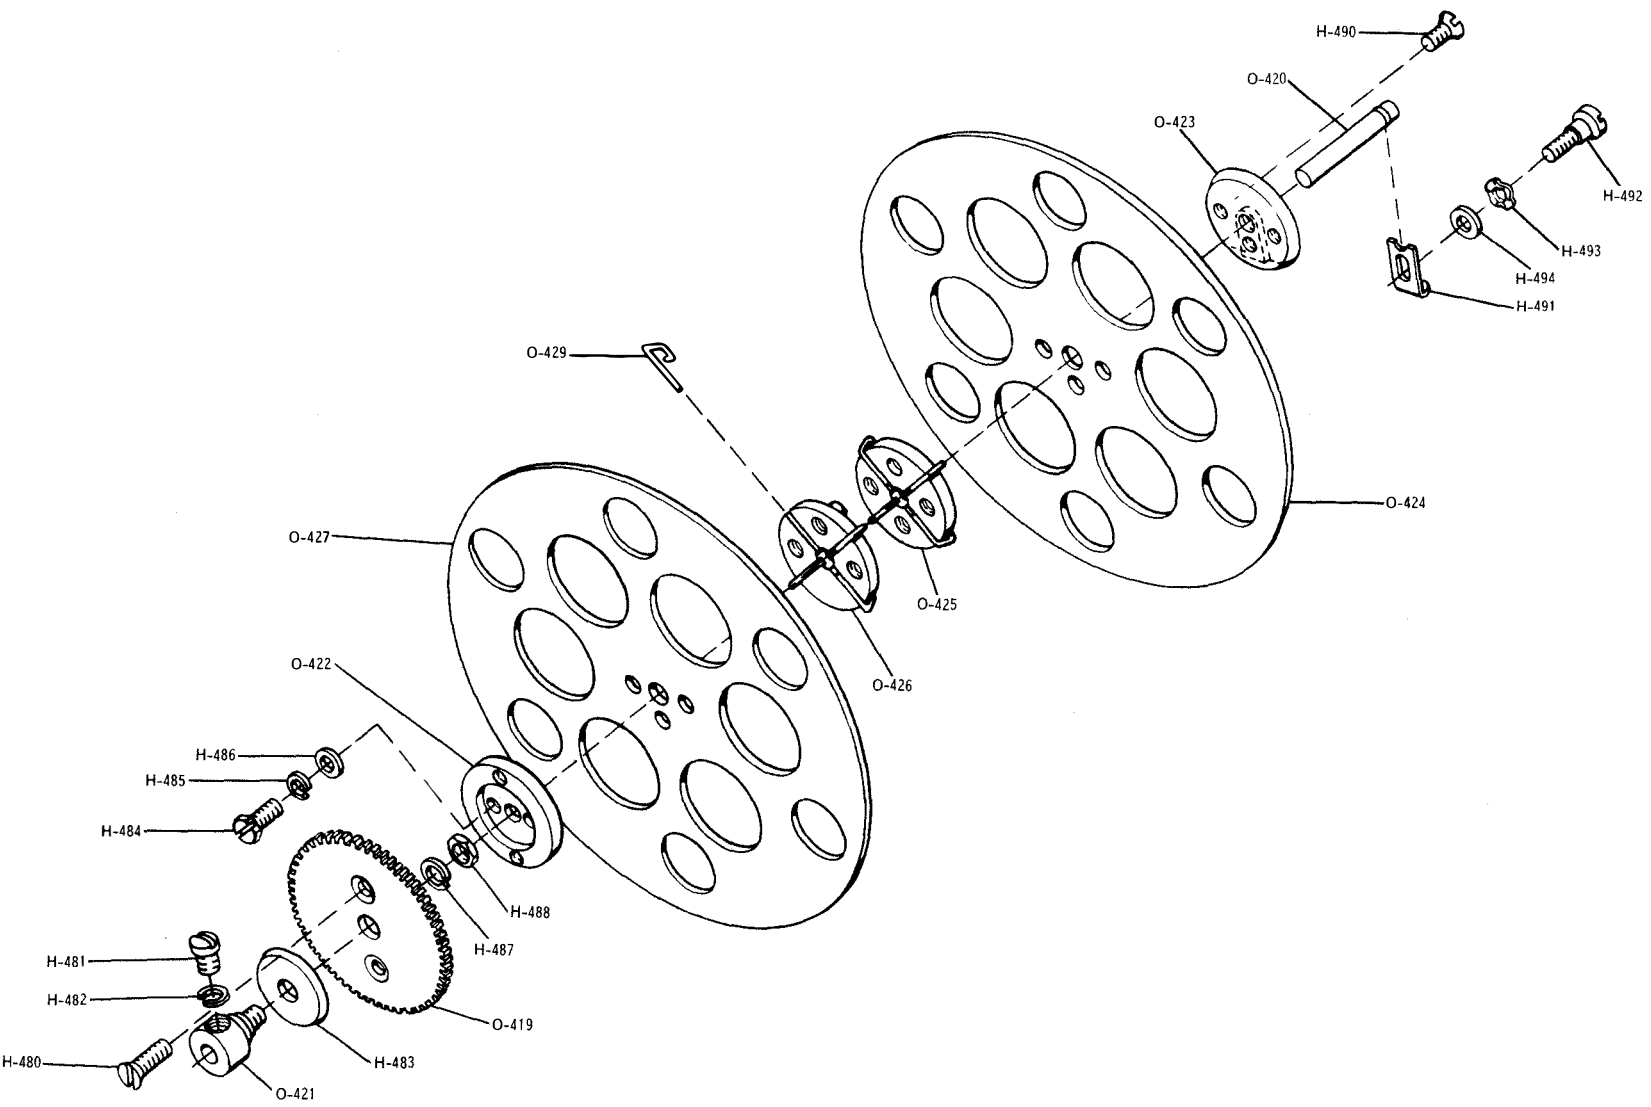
Reeling Machine RL-173/FGC, Tape Reel Assembly
